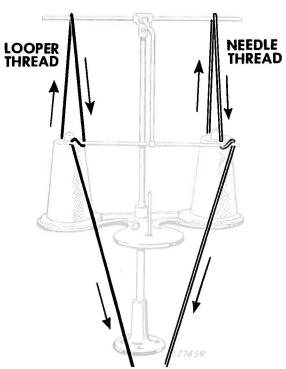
Unwinder 151031 Threaded for Two-Thread Stitch
